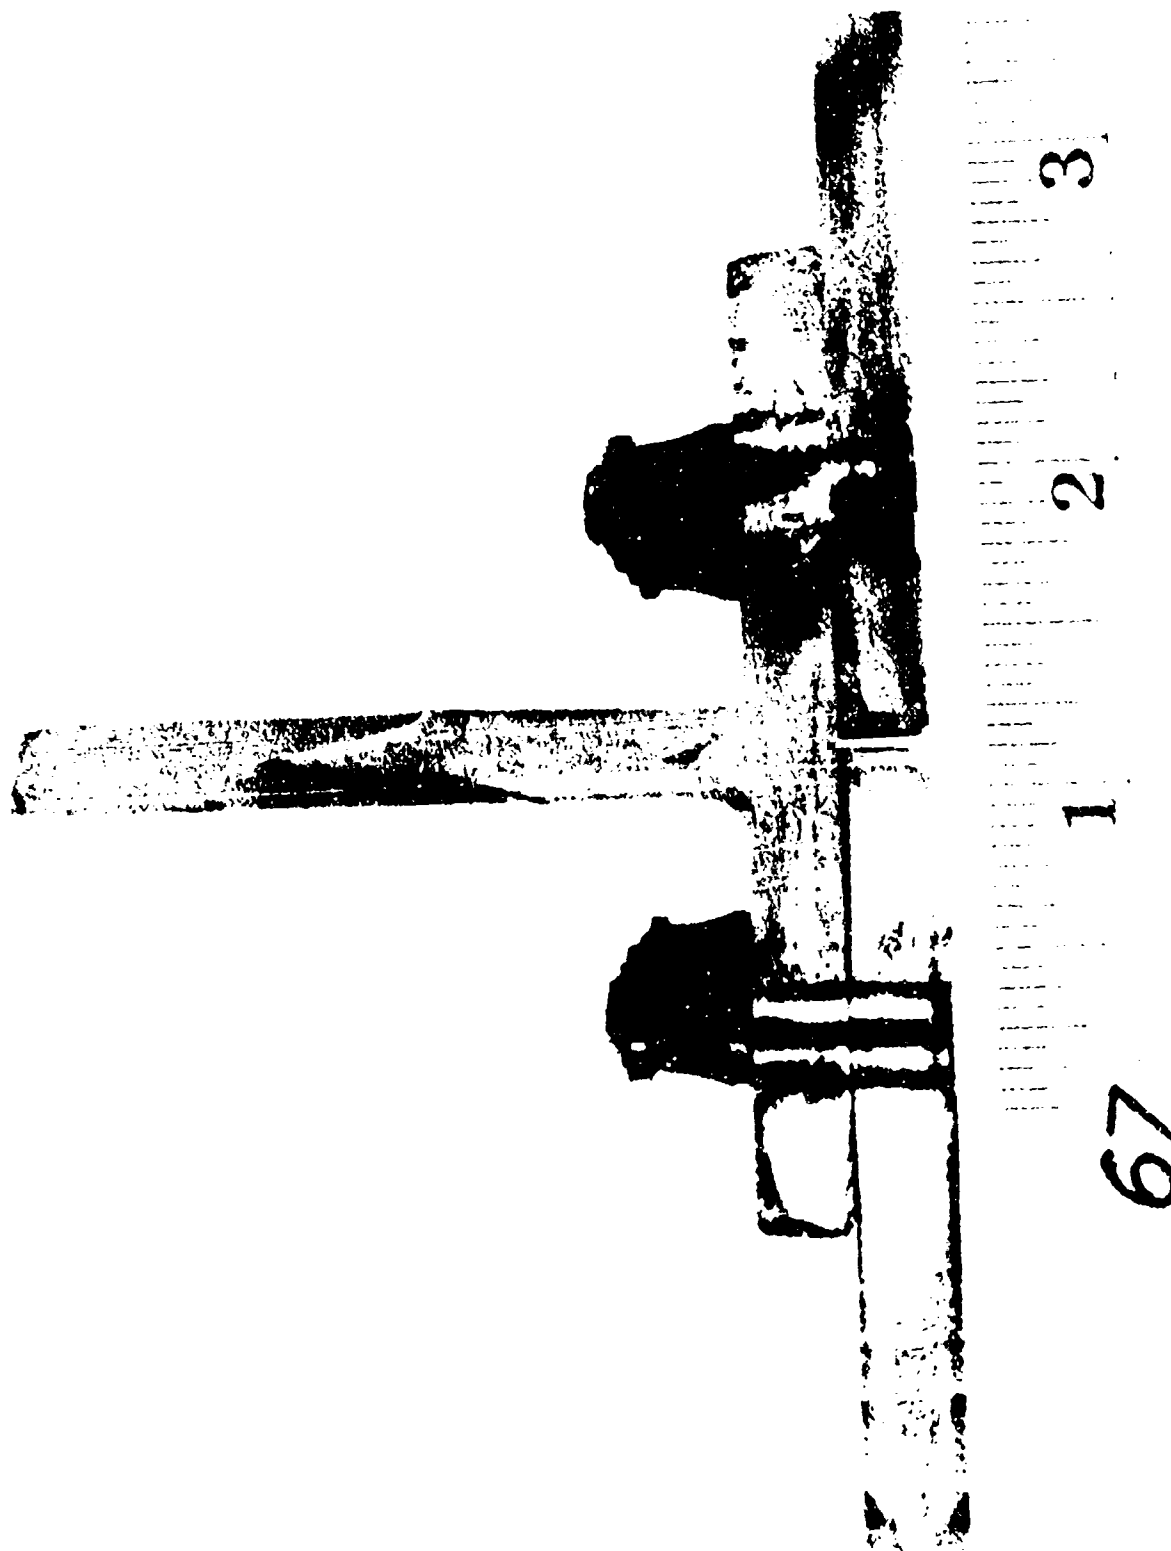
Specimen No. 67 Fracture Surface Subsequent to Failure
